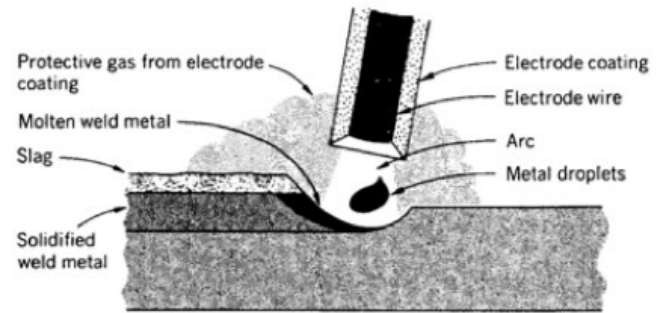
Shielded Metal-Arc Welding, SMAW [26]
